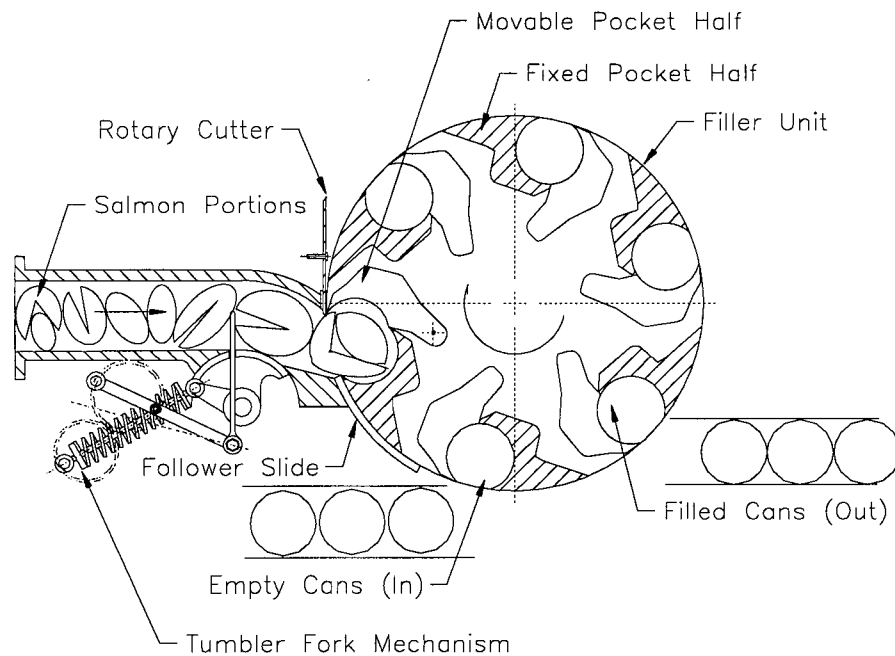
Tumbler-Fork Mechanism that Feeds the Fish Portions into the Filler Unit
